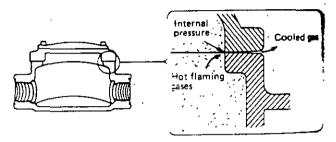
Hot gases are cooled as they pass across a machined-flanged joint. The clearance between the machined surfaces is kept very small.
